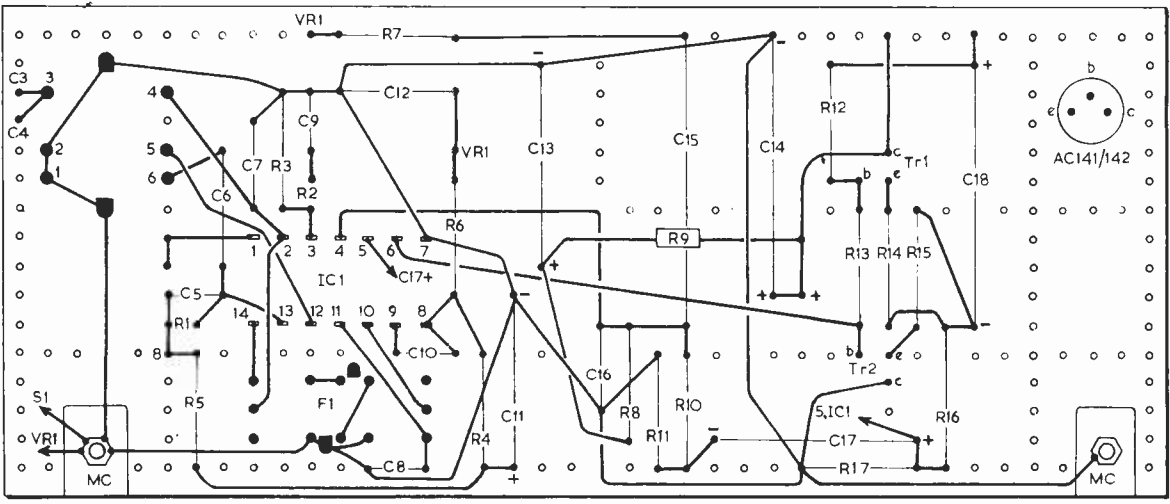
Component layout on the perforated board. Use insulated wire for the underside wiring.
